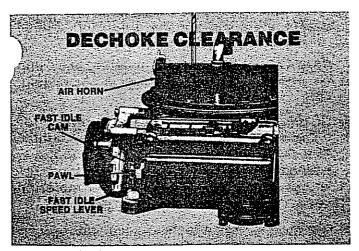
DECHOKE CLEARANCE ADJUSTMENT
